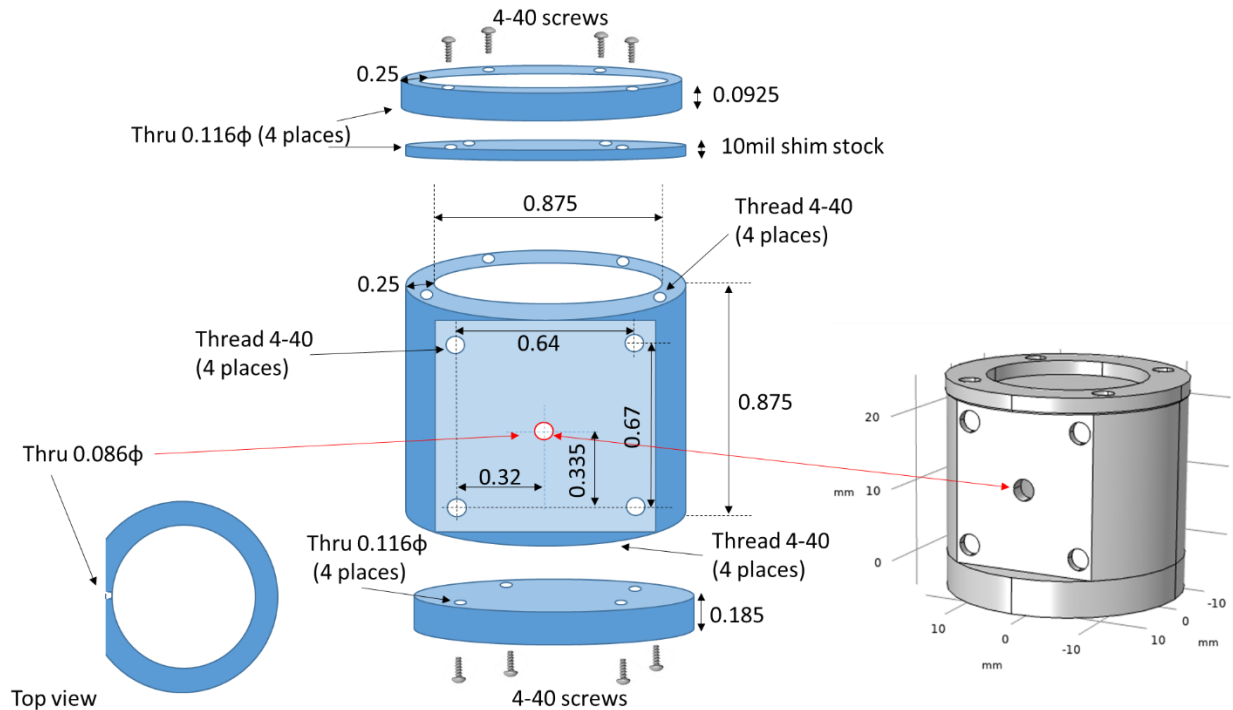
Side view and 3D visualization of the cylindrical cavity design.
